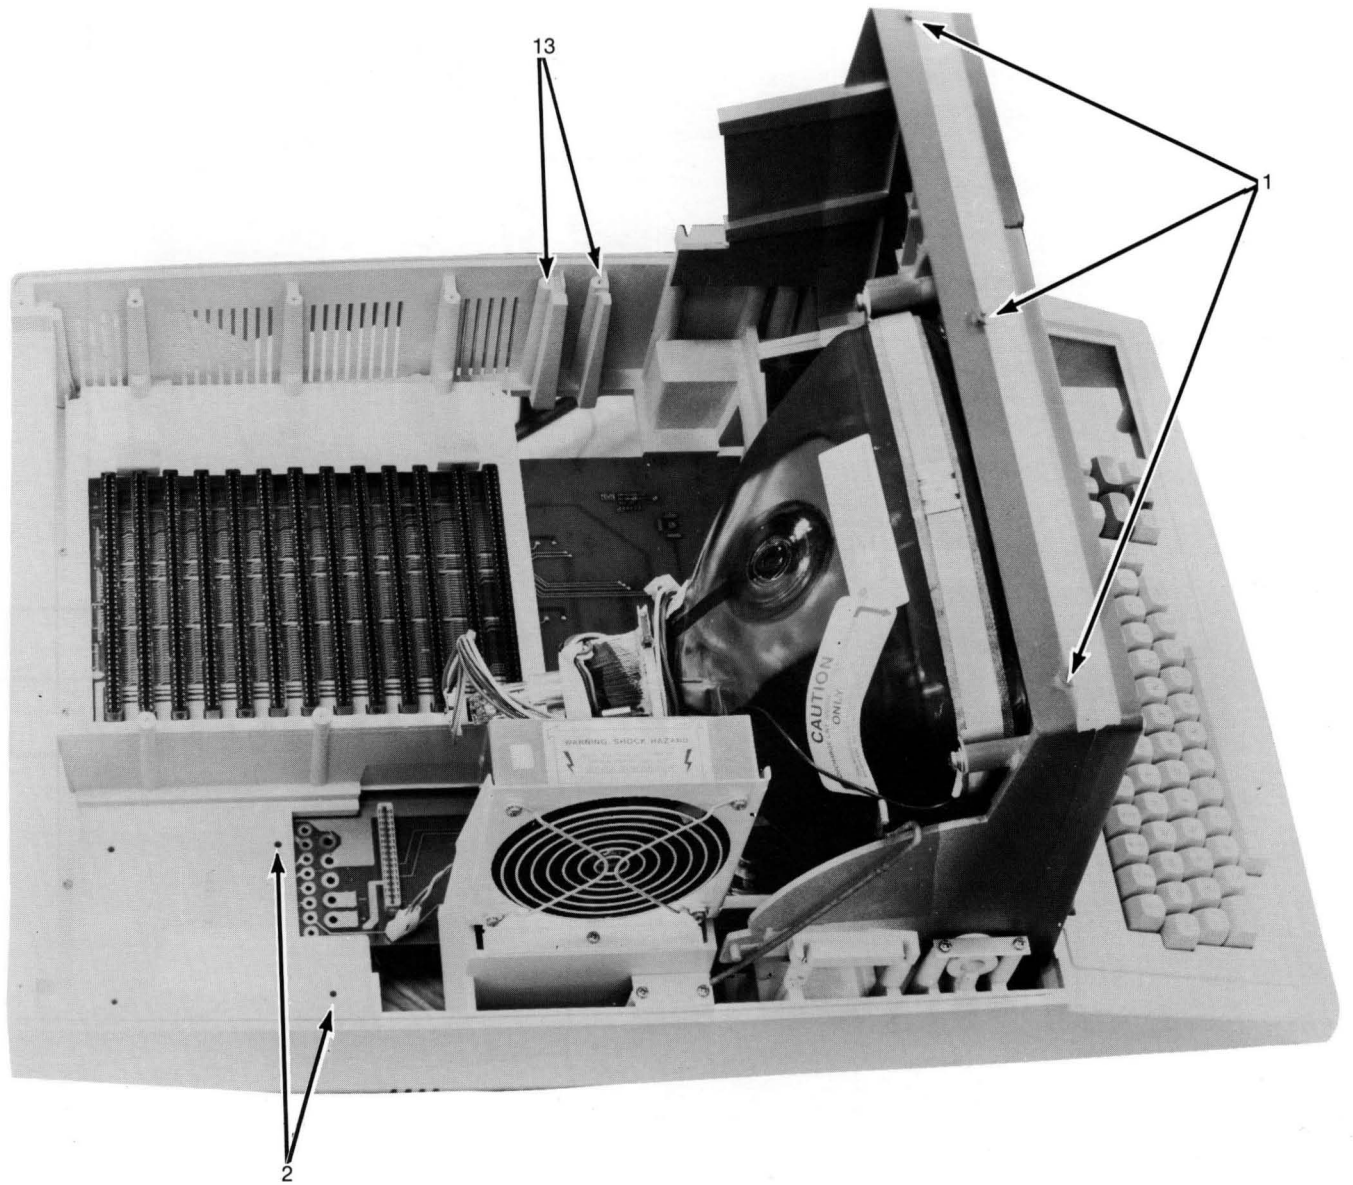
Mainframe Attach Screw Locator (Sheet 4 of 7)
